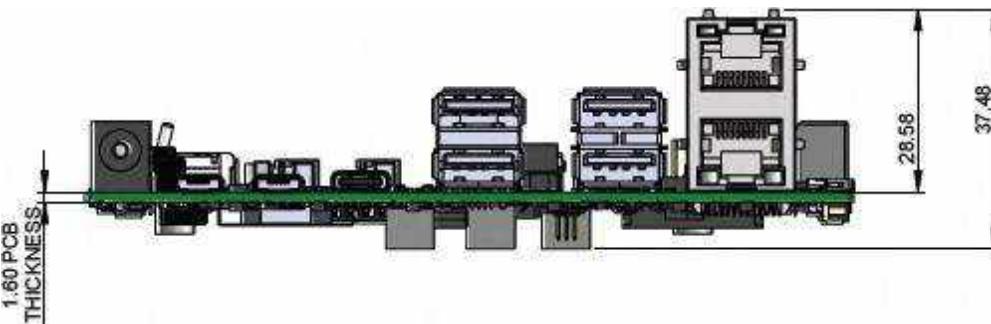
Mechanical dimension of i.MX 8M Plus Q/QL/D SMARC Carrier Board- Side View
